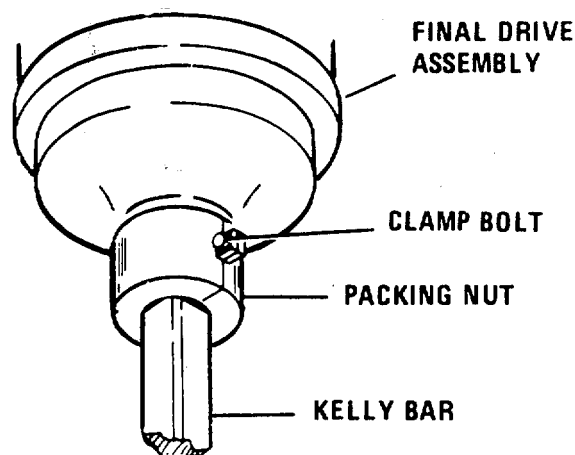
KELLY BAR (LOWER) PACKING NUT
